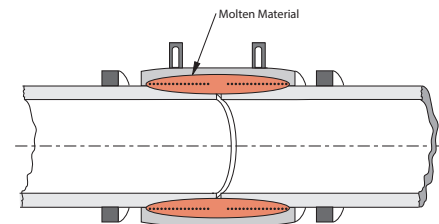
Molton material from both coupling and pipes form weld
